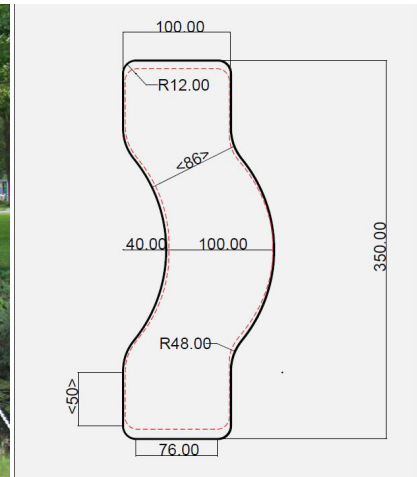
Technical drawing of the optimized glass "belly" brick shape with dimensions. [Sombroek, 2016]
